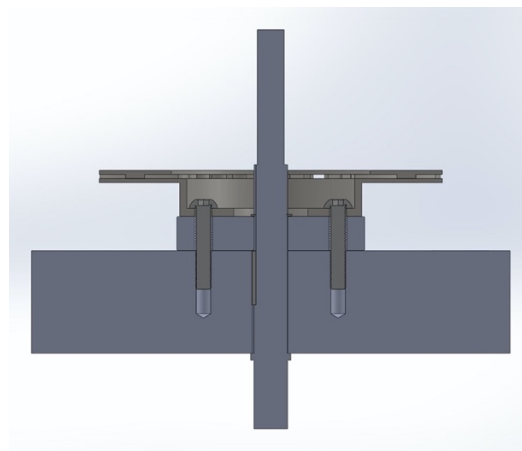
Cross-sectional view of flywheel subassembly with joining braking subassembly.
